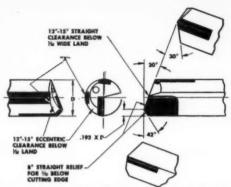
Cutting and relief angles for carbide all-depth drills.
